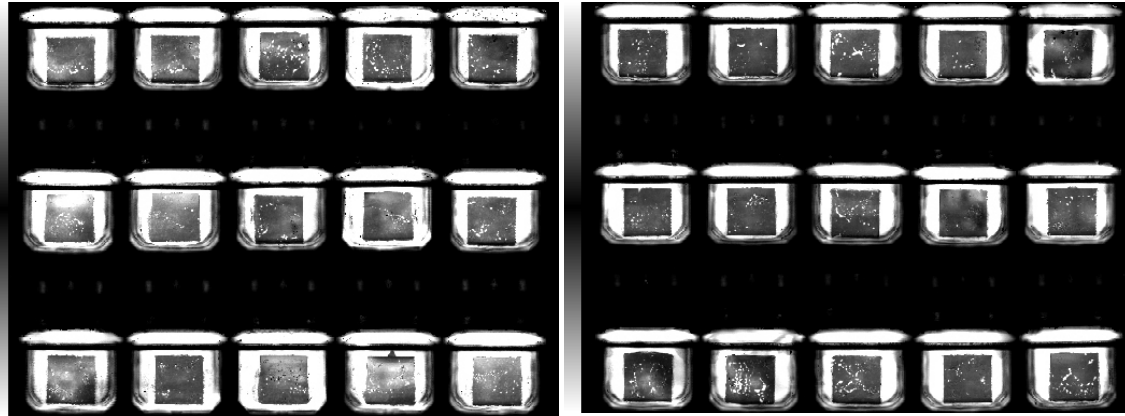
Experiment 1ref, standard A2, SAM of chip solder layer after TC500
